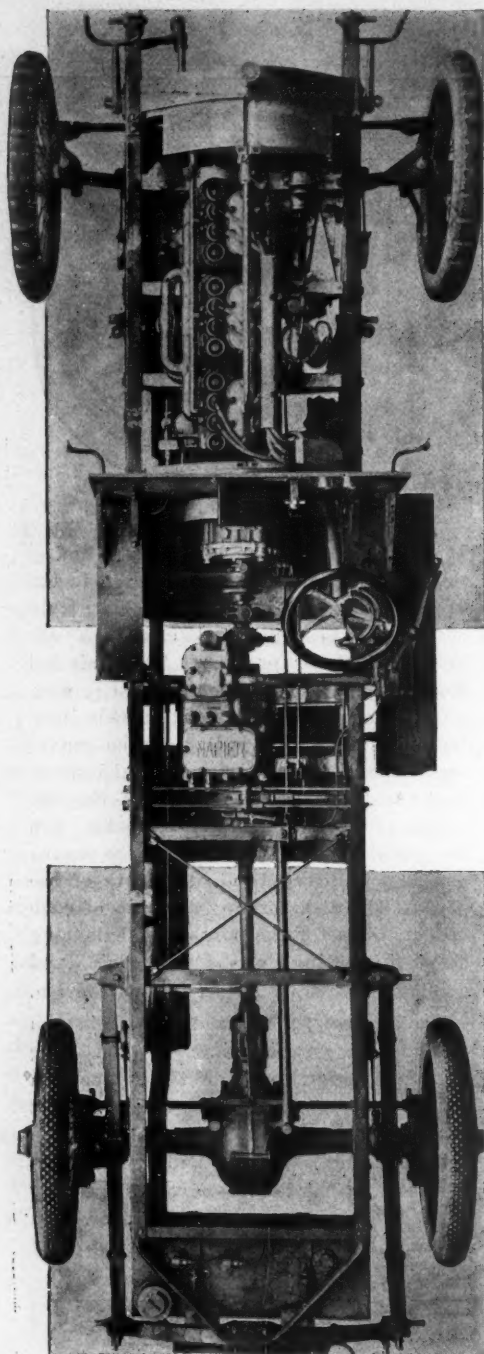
PLAN VIEW, SIX-CYLINDER CHASSIS
